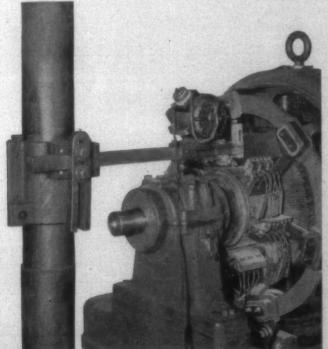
Motor Driven Portable Tool for Undercutting Commutator Mica
